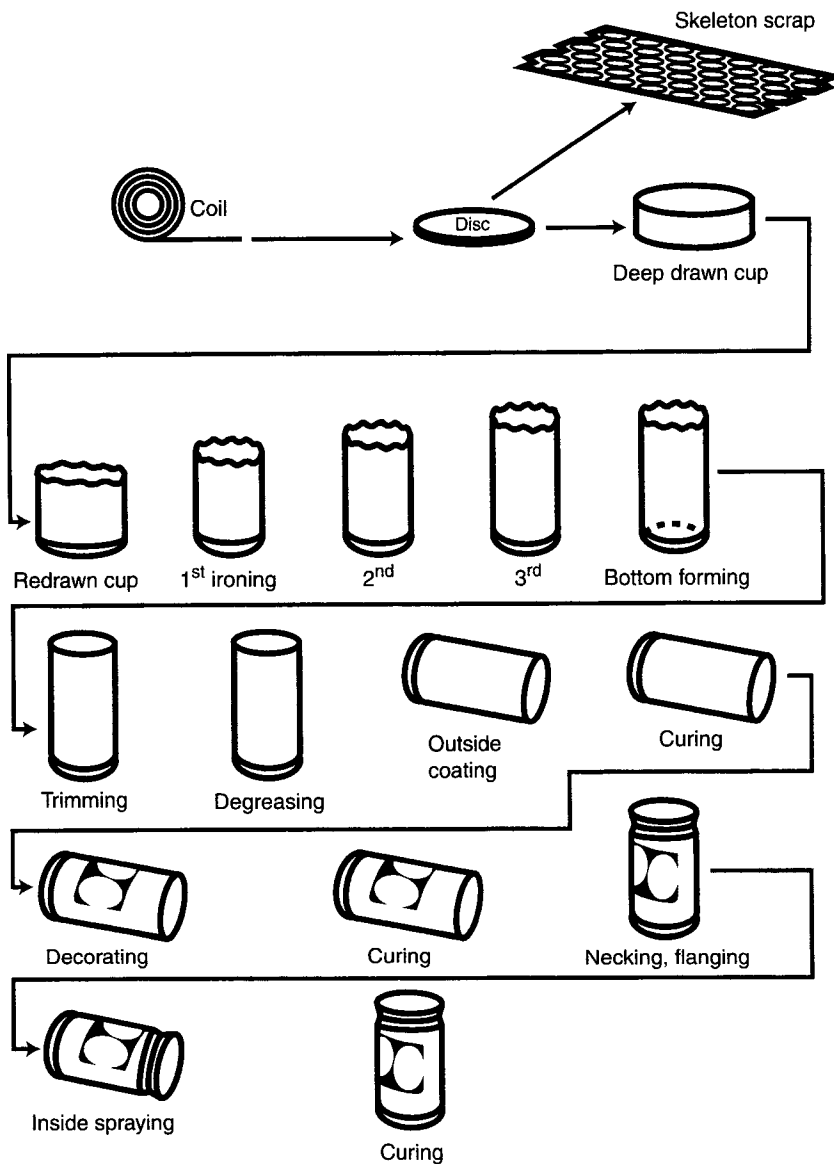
Steps involved in canmaking by the draw, redraw and ironing process.
